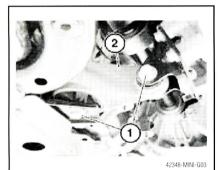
Showing location of engine stabilizer bar—Cooper Coupe models
